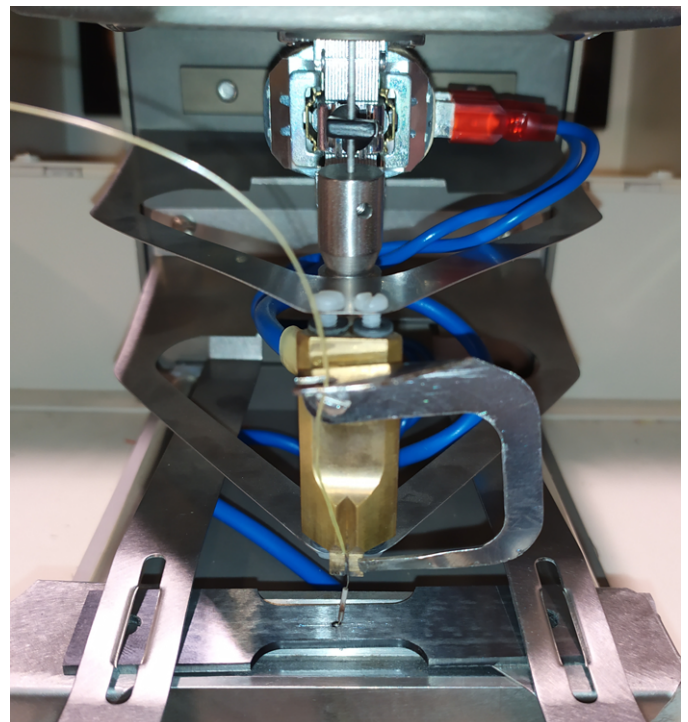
Preparation of the sample by welding a thermocouple
